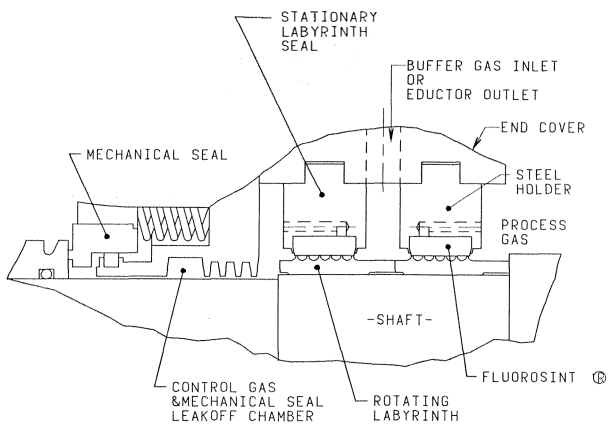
Typical Centrifugal Compressor Shaft End Labyrinth Seal.
